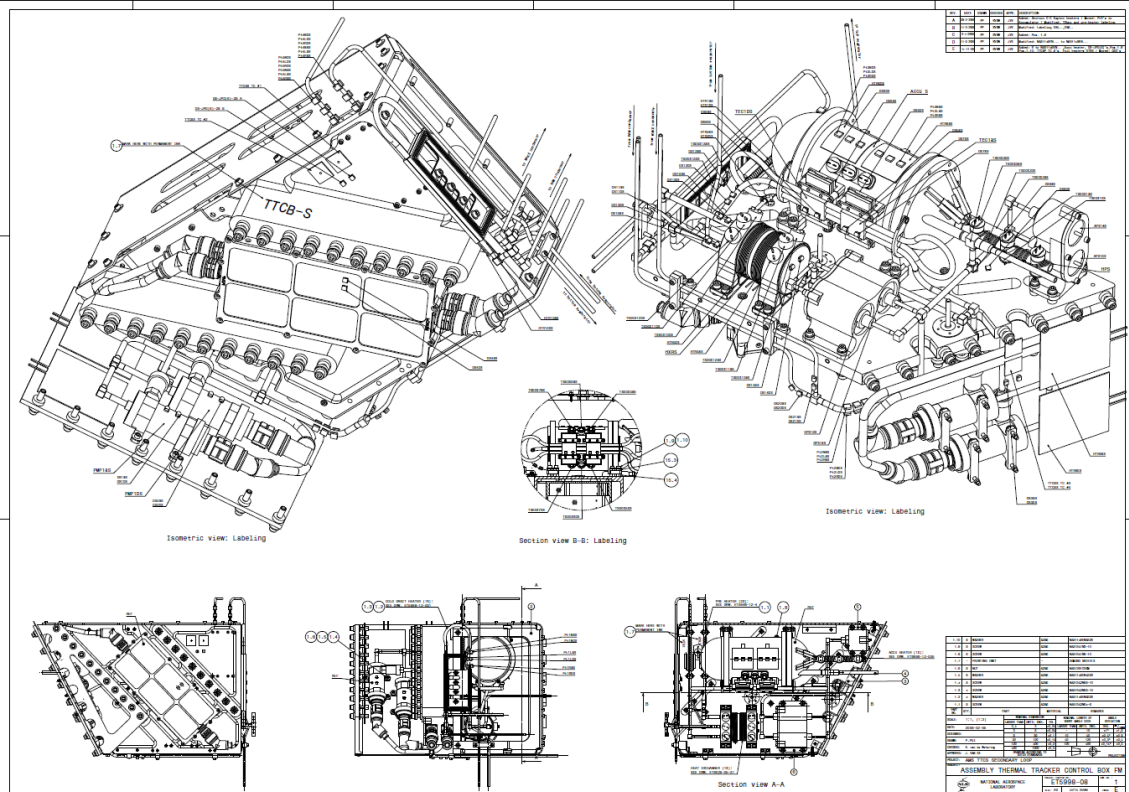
TTCB-S box assembly (NLR detailed design)
